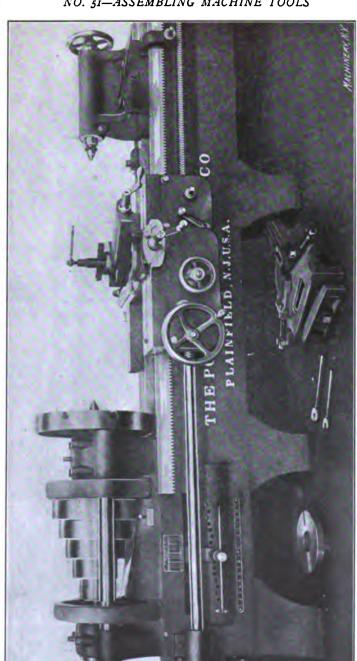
Twenty-four-inch Engine Lathe with Quick-change Gear Device
